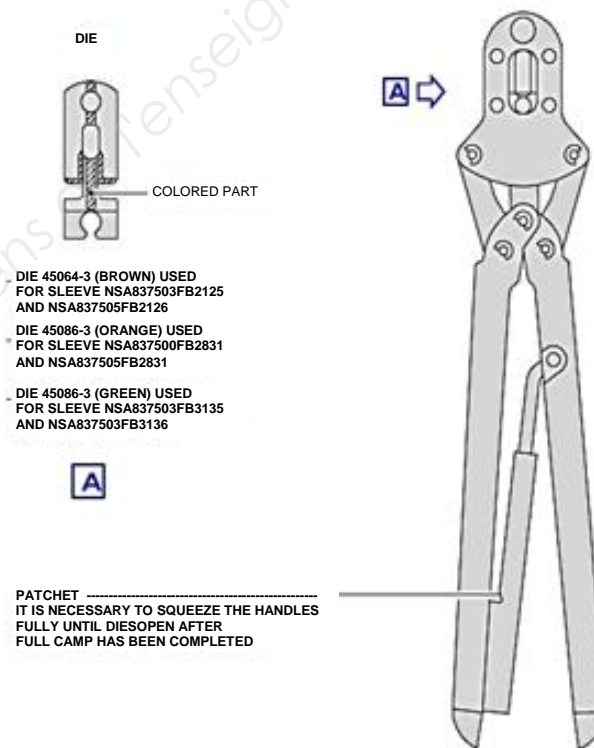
(Sheet 1) / 20-25-22 - Hand Crimping Tool-AMP P/N 59500
